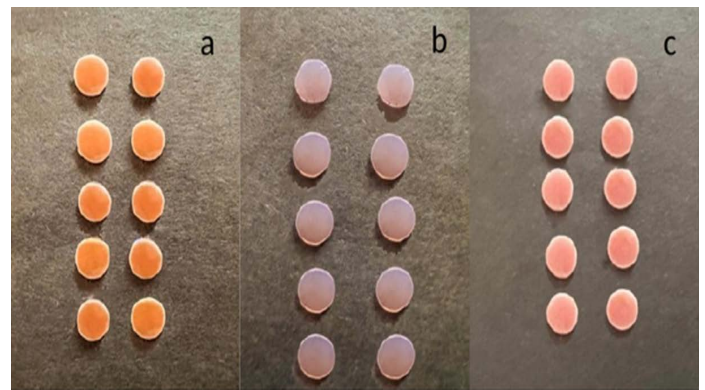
a) Milled specimens, b) 3D printed specimens, c) Heat-polymerized specimens
